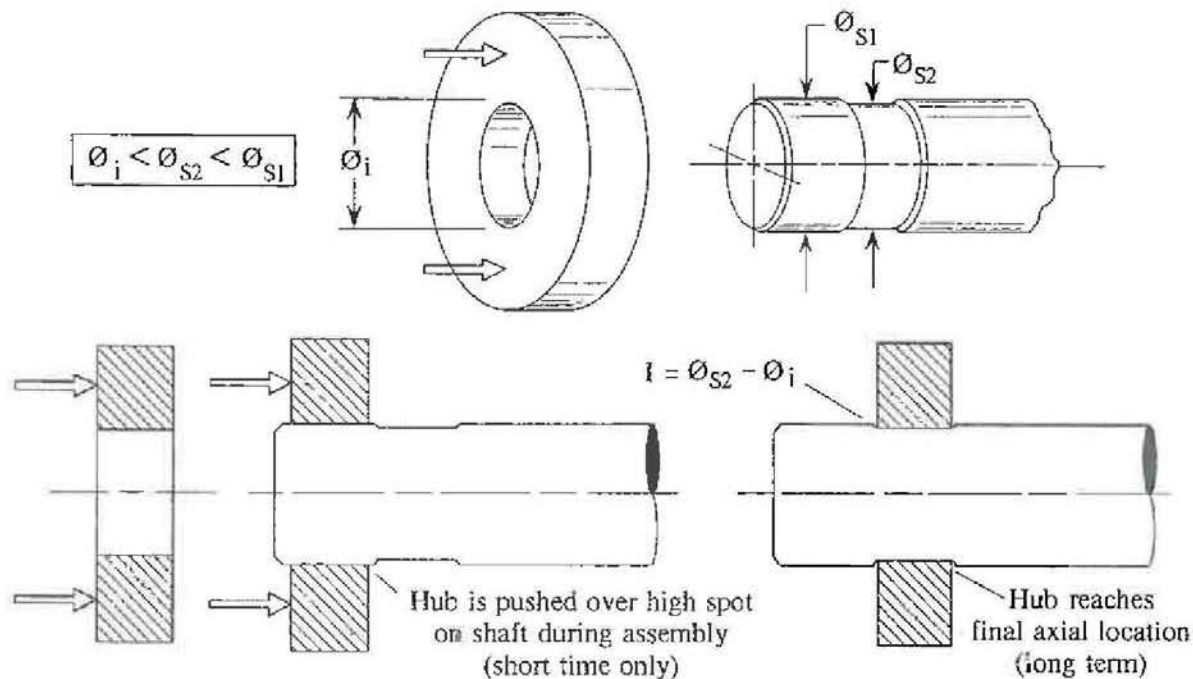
Use of an undercut shaft for press fit hub / shaft assemblies will locate the hub axially. The stresses associated with both the long term and short term interference (as the hub is pushed onto the shaft) must be considered by the designer.
